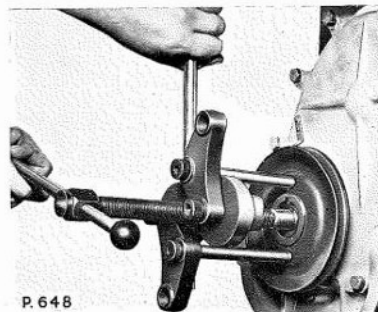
Withdrawing the crankshaft pulley, using Churchill Tool 55 and the adaptor set R.G.55-4
